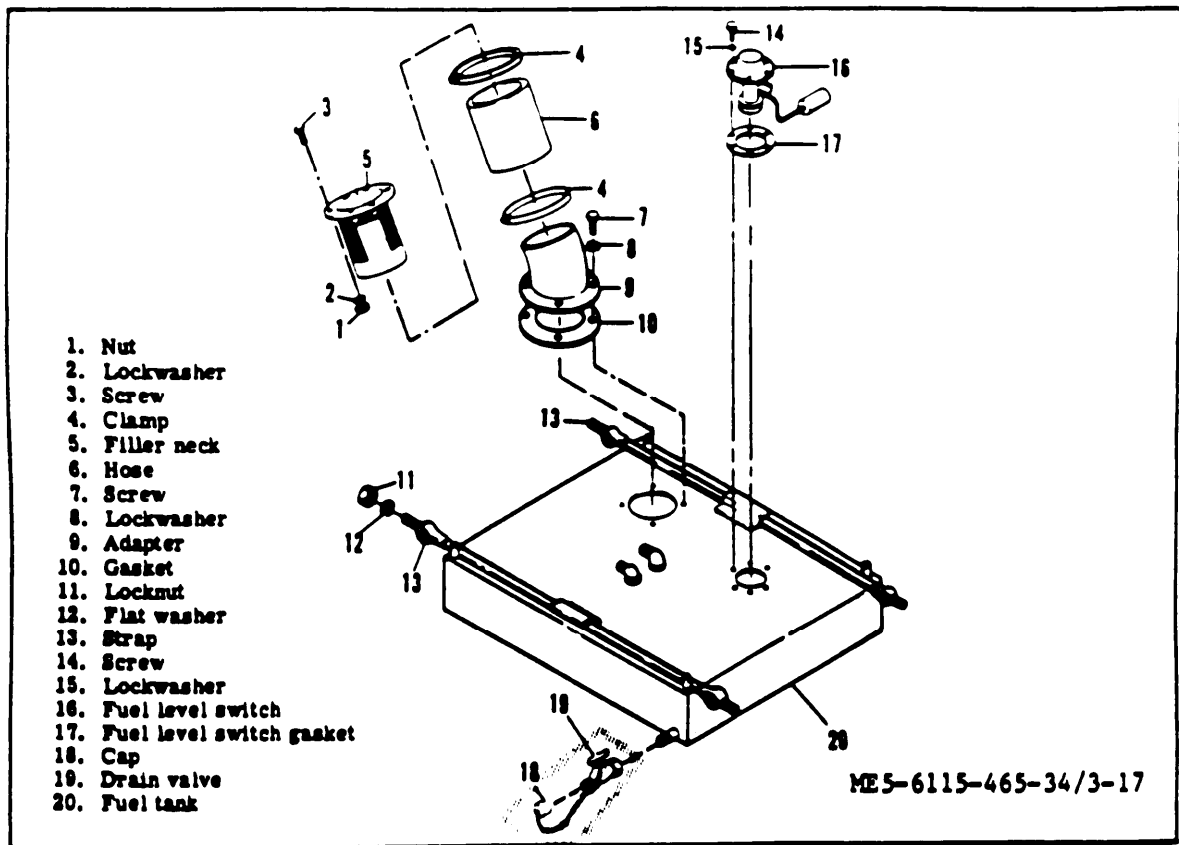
Main Fuel Tank (Metal), Removal and Installation
